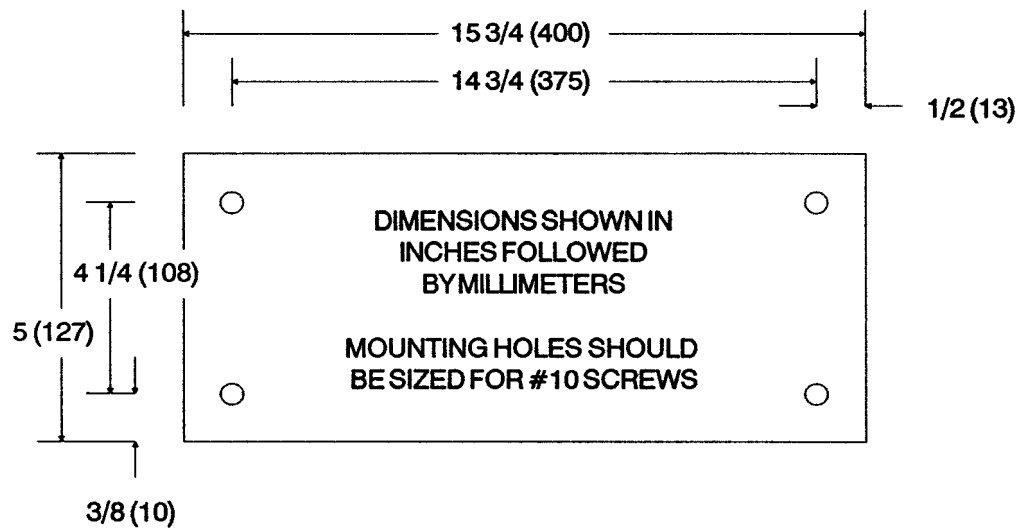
PLS-850 Assembly, Mounting Requirements
